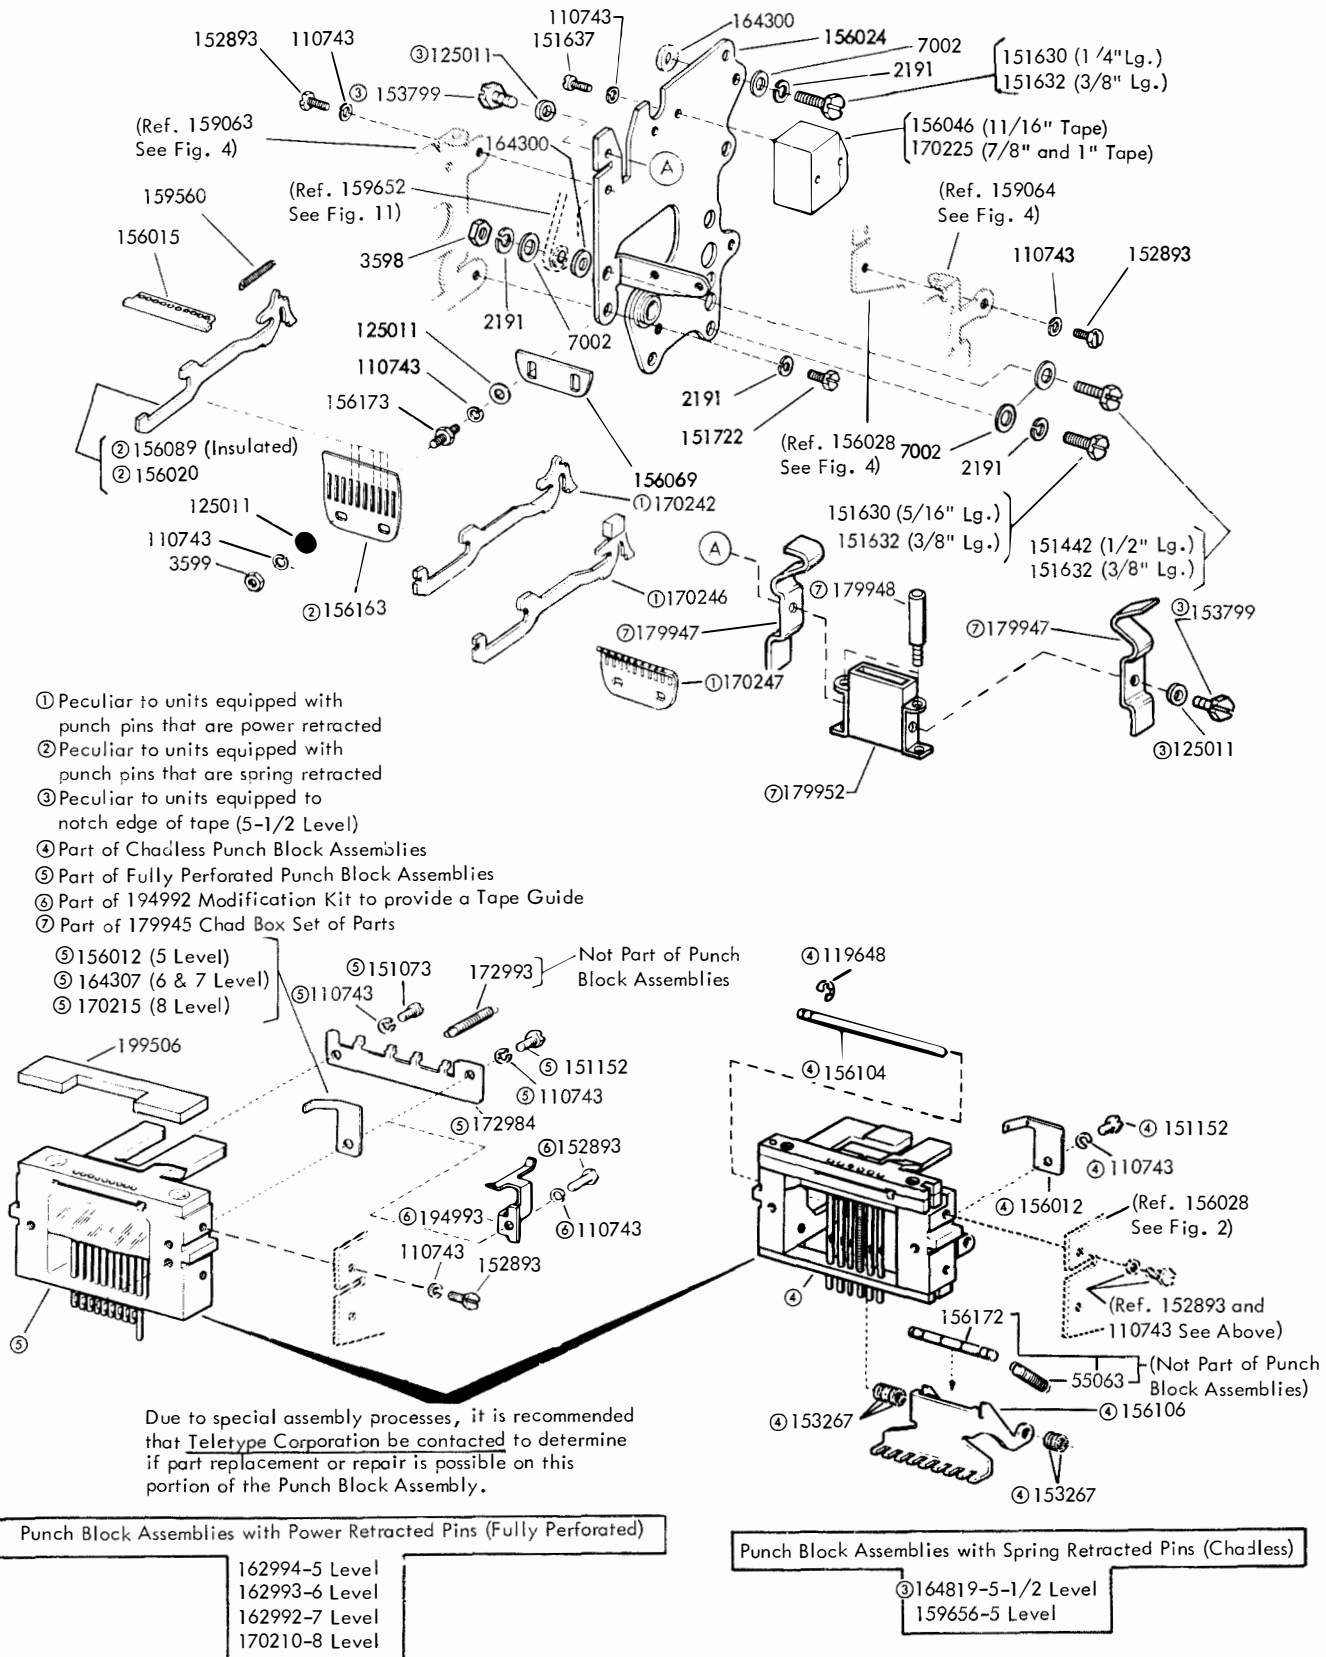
REAR PLATE AND PUNCH BLOCK ASSEMBLIES
